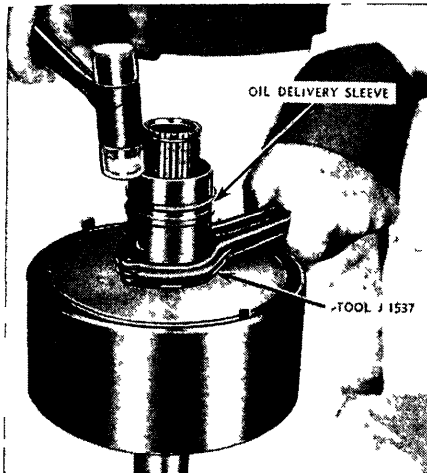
Install oil delivery sleeve with long bearing up. Use ring compressor to compress exposed rings. Install snap ring into second groove on planet carrier.
